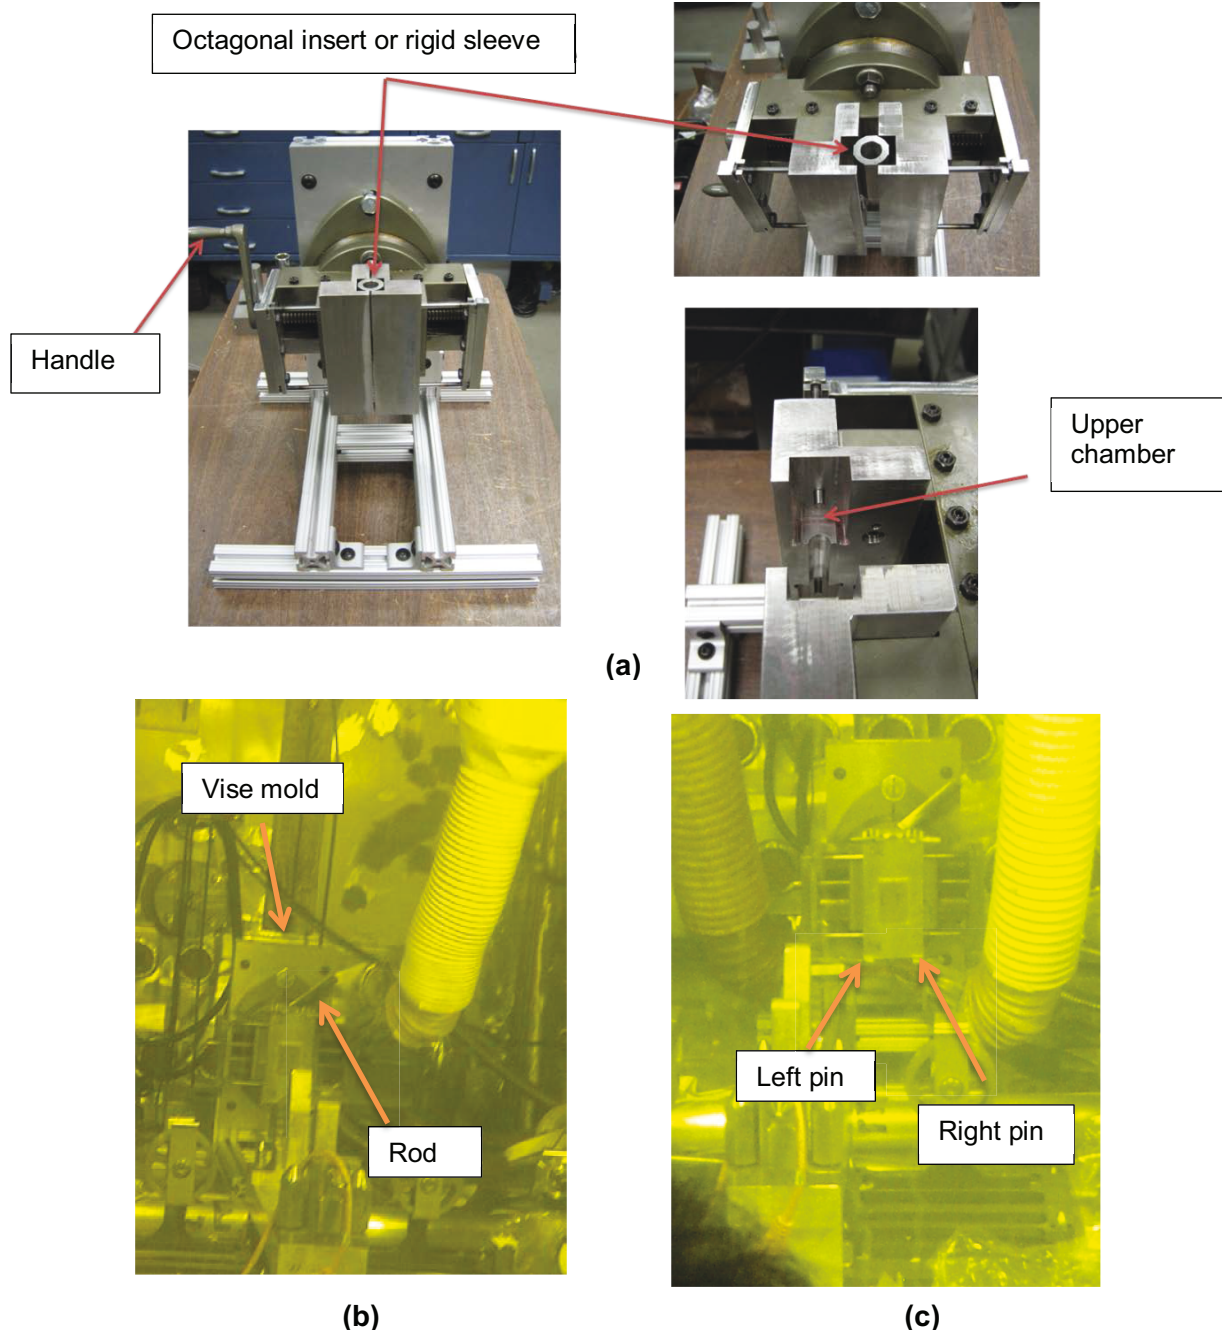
(a) Vise mold for assembling octagonal rigid sleeves into a rod, (b) rod (Demo1, 606B2) to be inserted, (c) one pin turned away, rigid sleeve loaded with epoxy inserted into the lower chamber
